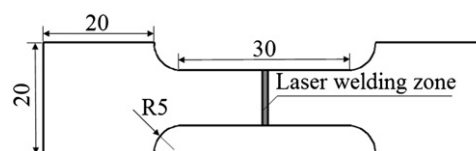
The dimensions of the laser weld tensile sample (unit: mm).
